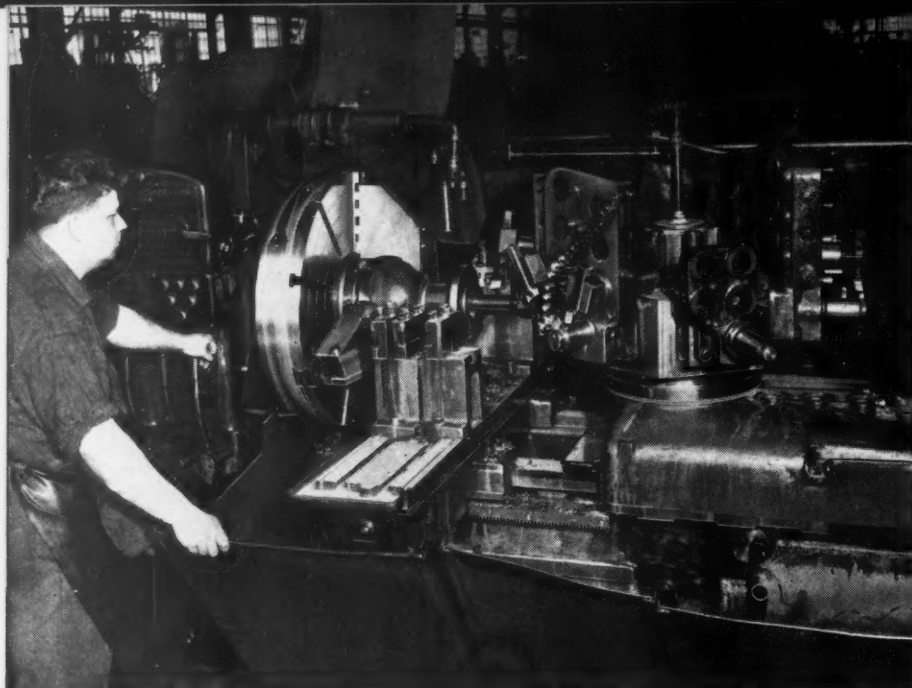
Smooth surface finishes and close tolerances are attained in machining the flanged ends of axle trunnion sockets for steering-knuckle assemblies
